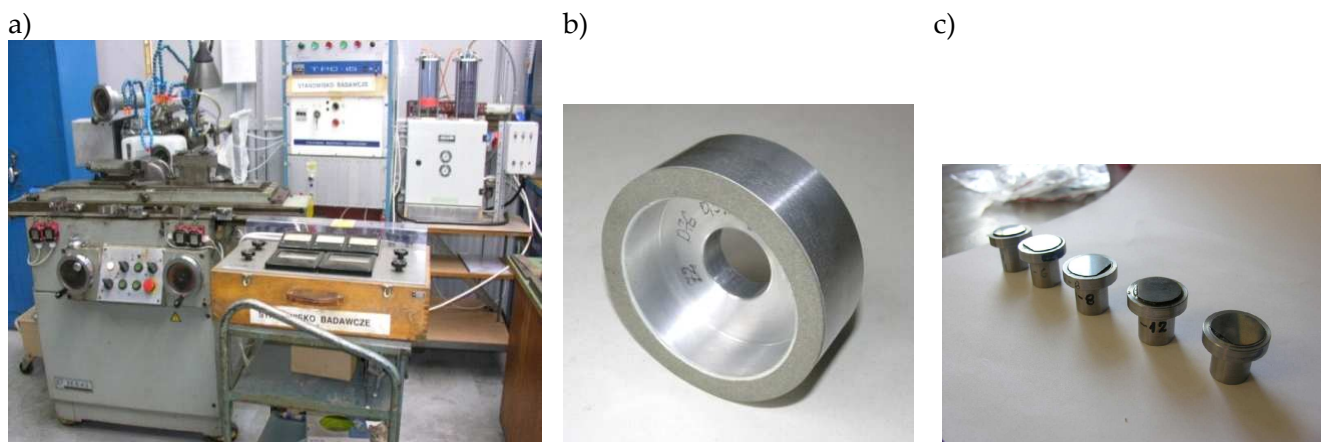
a) The position of a universal tool grinder 3E642 grinding tests with cooling, b) diamond grinding wheel vitrified Ba23 bis c) composites BNDCC intended for research
